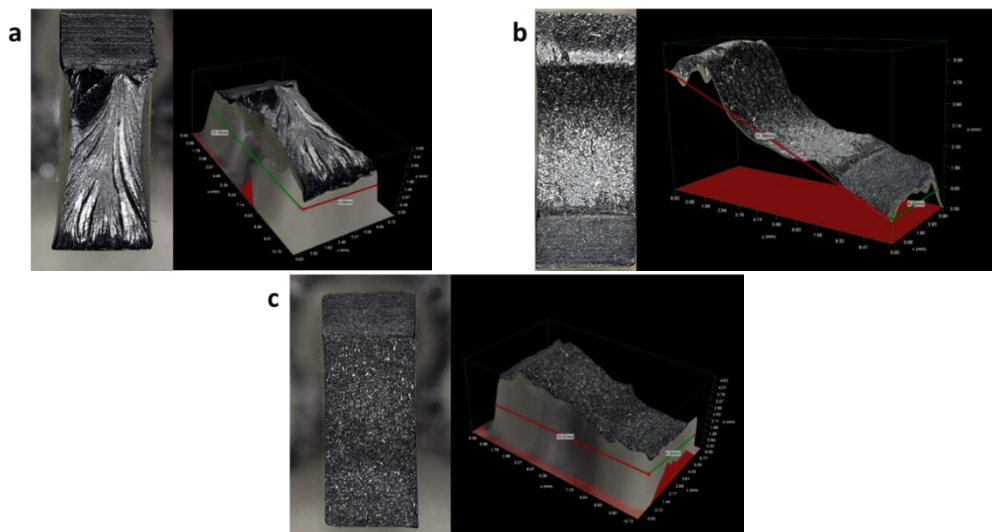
Broken probes after the dynamic Charpy impact tests, using a 5 [J] hammer: (a) Makrolon 2405; (b) Makrolon 9415; (c) Makrolon 8035.
